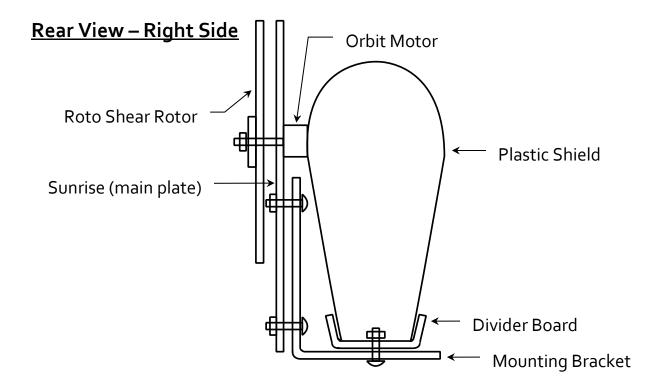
Roto-Shear John Deere Draper Header (27000-12)
